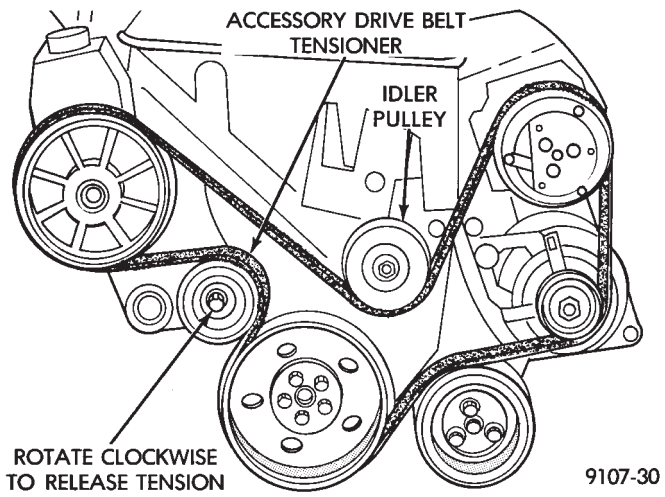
Accessory Drive Belt—2.2L Turbo III Engine
